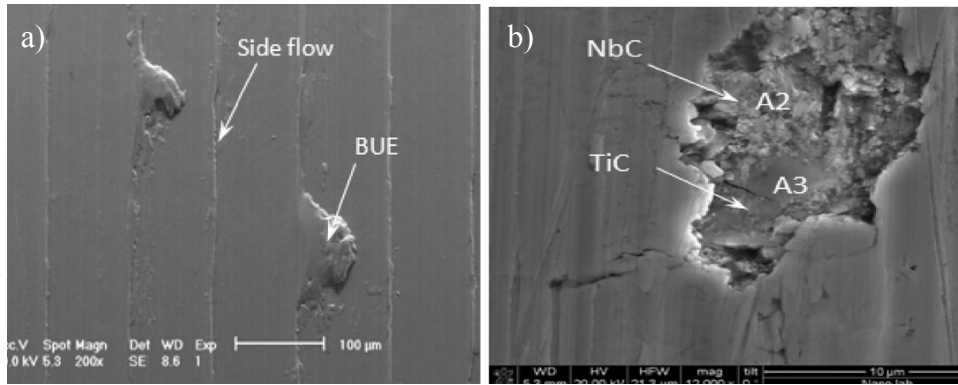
Typical surface damage produced in turning of Inconel 718 using whisker reinforced ceramics tools (a) side flow & BUE and (b) carbide cracking [21]
